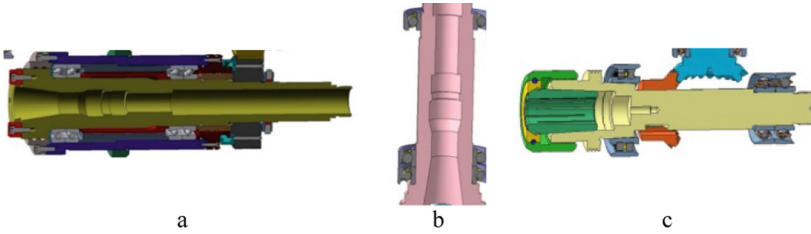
Three-dimensional models of spindle assemblies: a – horizontal; b – vertical; c – angular
